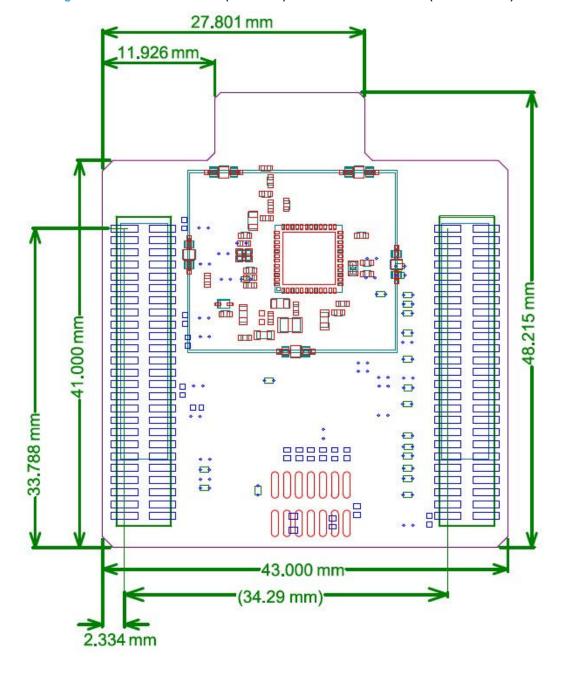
NUCLEO-WBA55CG (MB1803B) mechanical dimensions (in millimeters)
